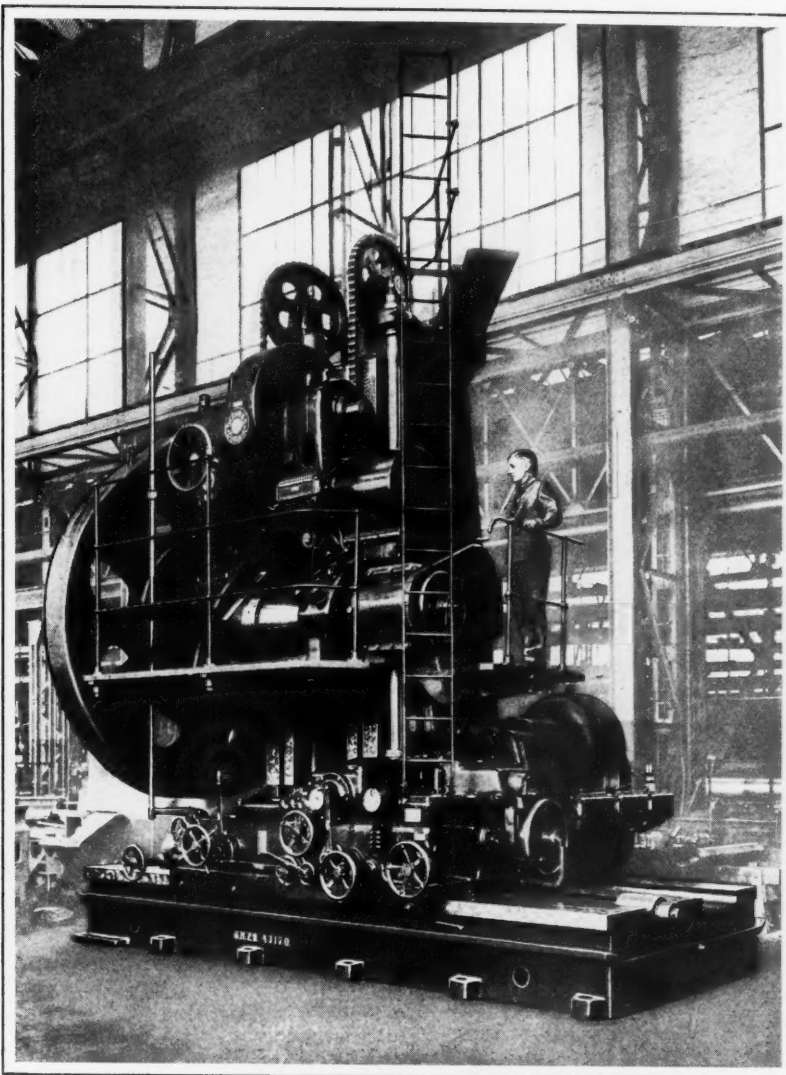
Control Side of the Large Horizontal Boring Machine Shown Below. This Machine will Bore Holes Thirteen Feet in Diameter
